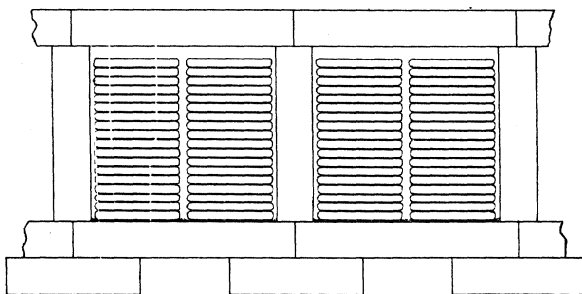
Method of Setting Shingle Tiles Flat, in Use at Murray Roofing Tile Company, Cloverport, Ky.
